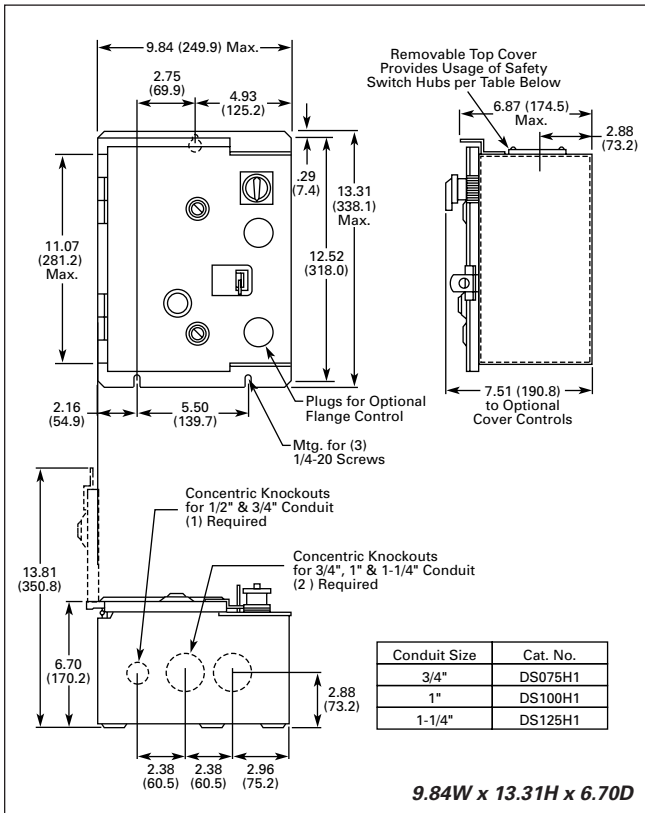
Box 5, Type 3R — Approximate Dimensions in Inches (mm)
